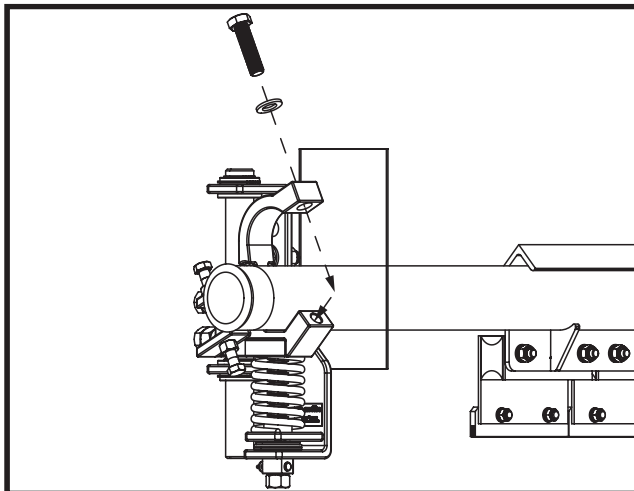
Martin® P2 Secondary Belt Cleaner HD
